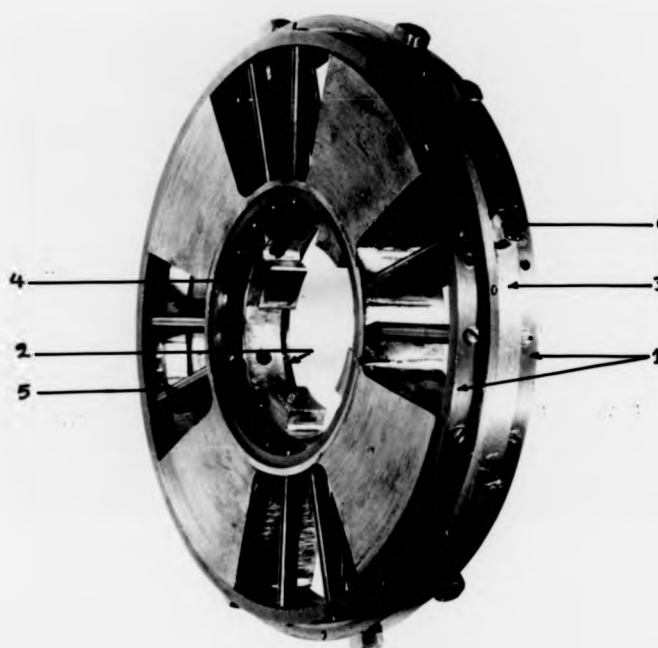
The rotor of the first prototype a.c. axial field disc motor after some of the iron has been machined for experimental studies in ref. (1.5).
